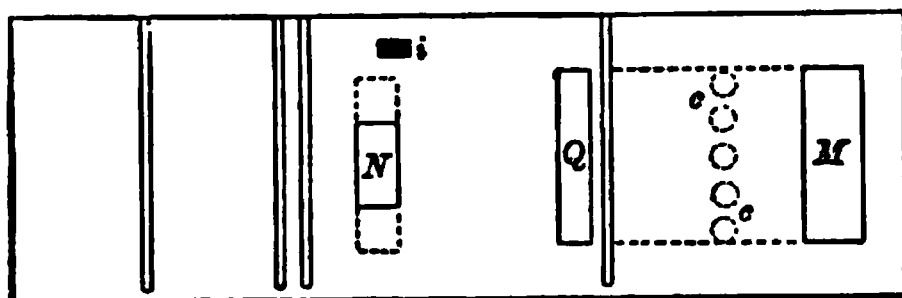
Otto Engine—Vertical View of Slide Valve.
